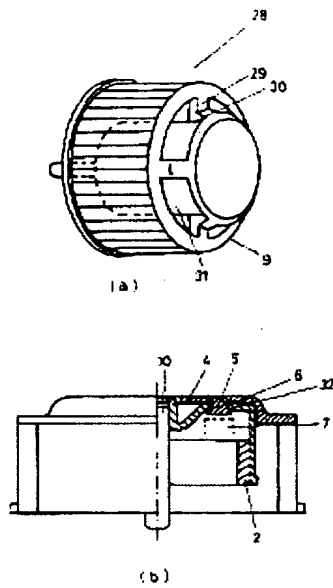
A half cross-sectional view showing a conventional sirocco fan motor
